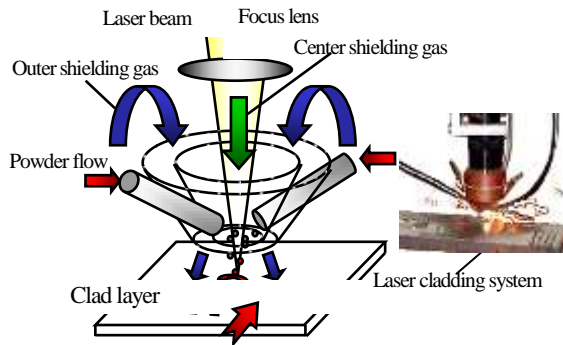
Schematic drawing of laser fabrication process with coaxial nozzle
